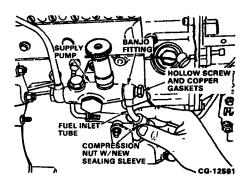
Install Fuel Inlet Tube (Fuel Filter to Supply Pump) (Early Production)
